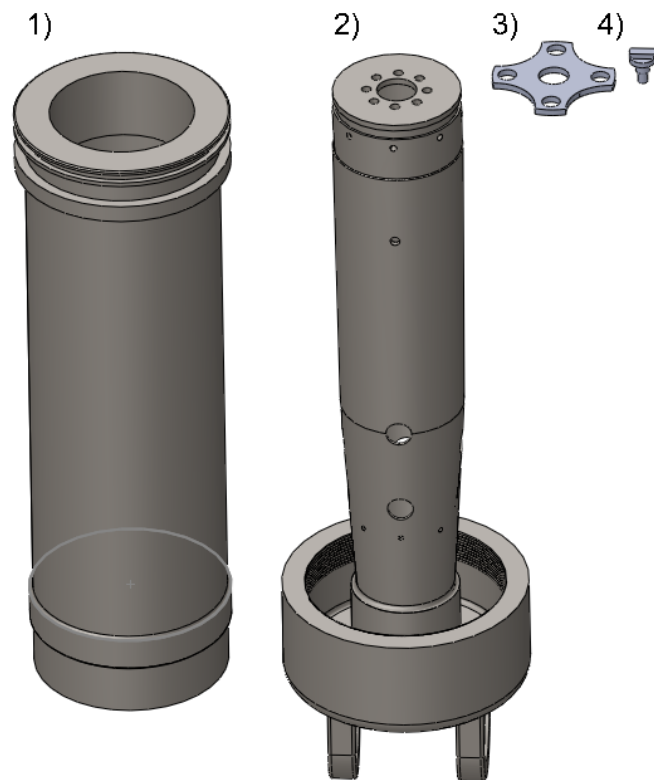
1) The secondary piston head, 2) the orifice support, 3) the snubber plate, 4) a shoulder bolt.
